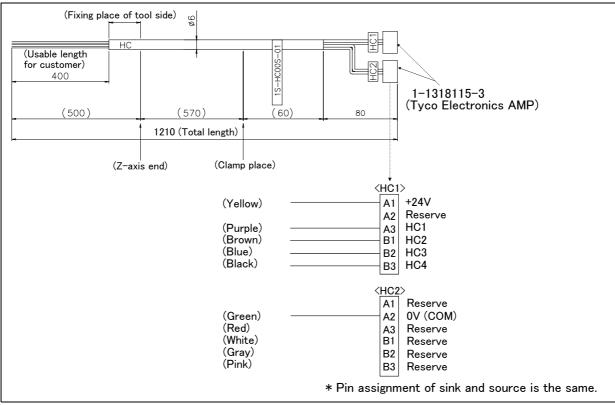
Outside dimensional drawing and pin assignment (RH-3SQHR series)
